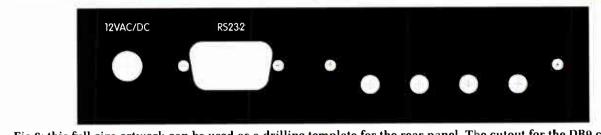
this full-size artwork can be used as a drilling template for the rear panel. The cutout for the DB9 connector can be made by drilling a series of small holes around the inside perimeter and knocking out the centre piece.
